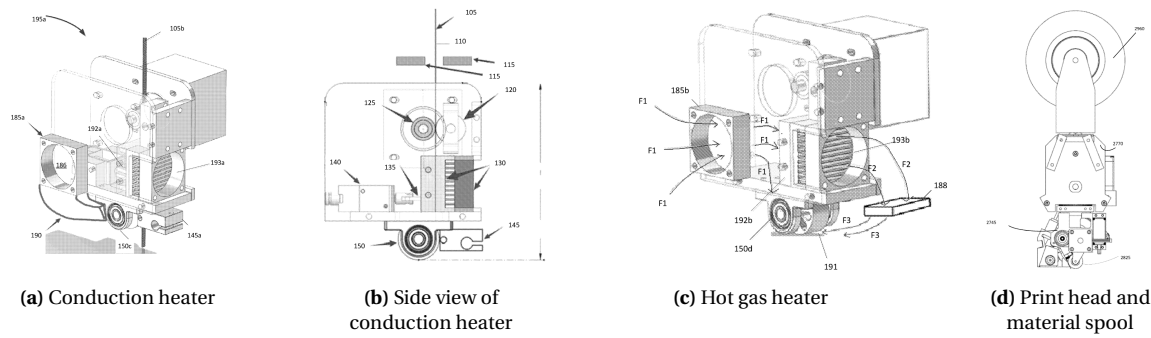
Desktop metal printer, using a architecture similar to that of an AFP machine where the head deposits a tape that is heated then compressed using a roller[40]
